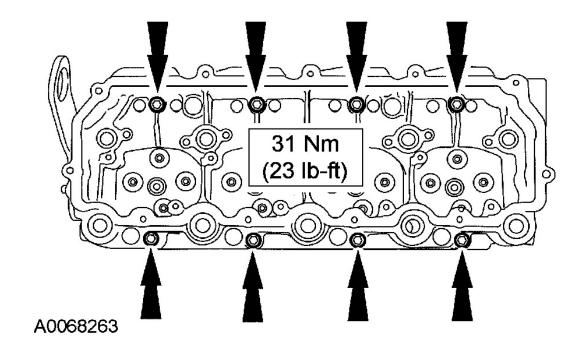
Installing Rocker Arm Carrier And Bolts With Torque Specifications Courtesy of FORD MOTOR CO.
